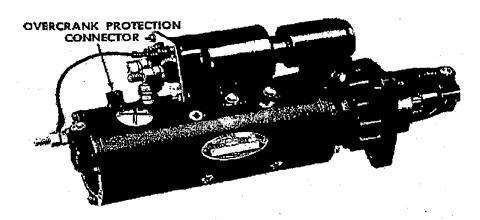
Typical motor showing thermostat connector (Overcrank Protection Connector)
